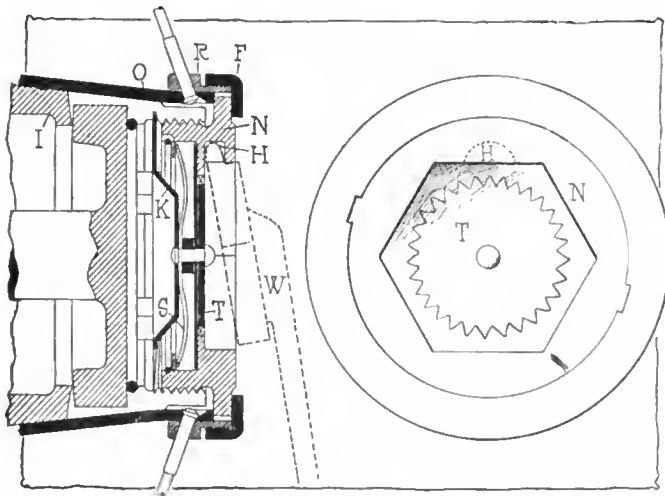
Special locking device adapted to McCue wheels by Edwards Motor Company
